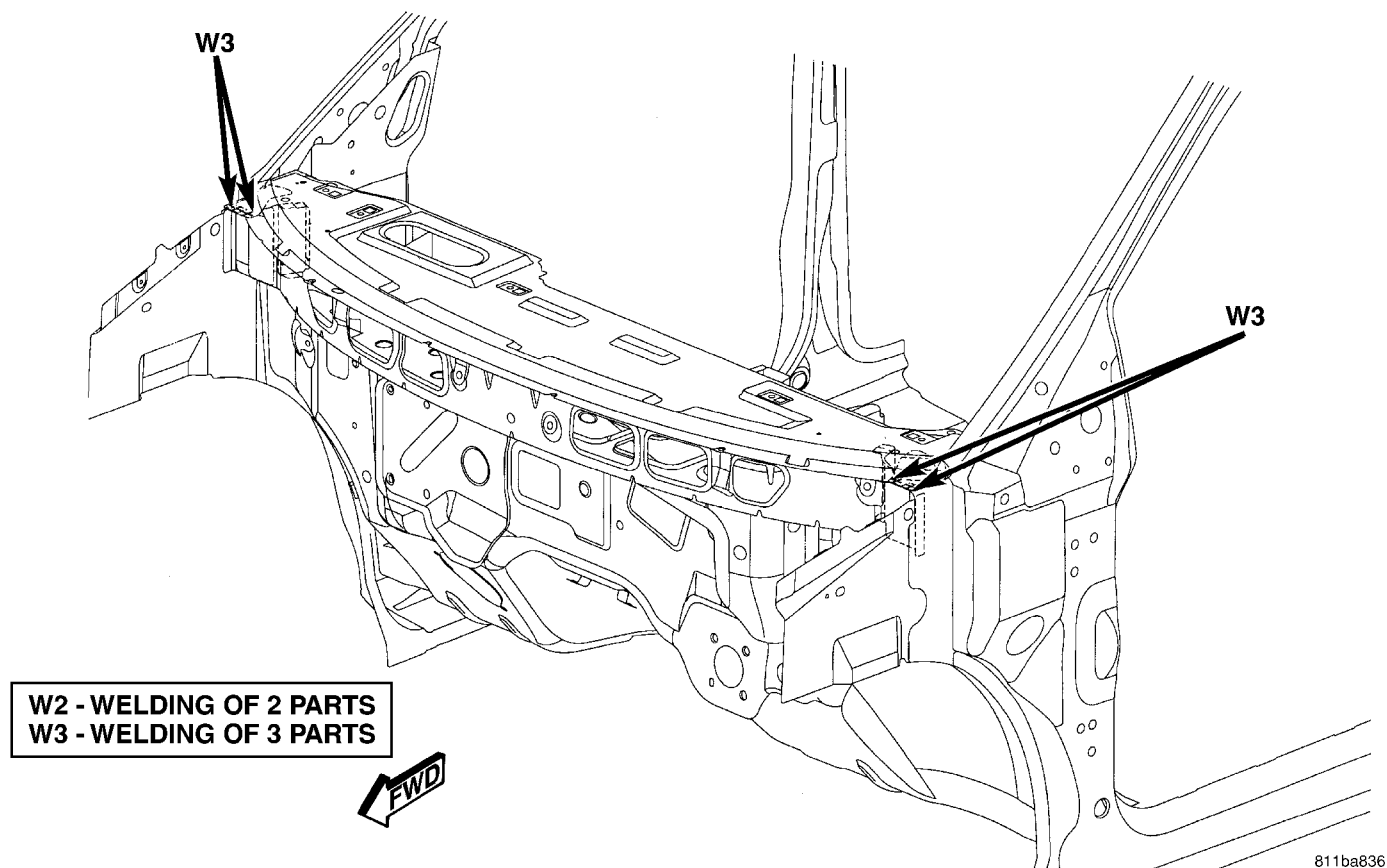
UPPER COWL PLENUM, GUSSETS, SIDE SHIELDS AND BODY SIDE APERTURE - RIGHT HAND DRIVE
